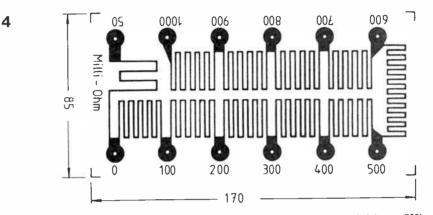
Track side of the printed circuit board for making the milli-ohm bank (shown 50% reduced).
